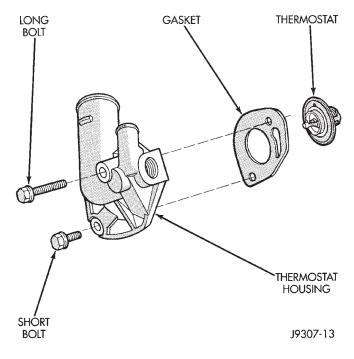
Thermostat Removal/Installation—4.0L Engine
